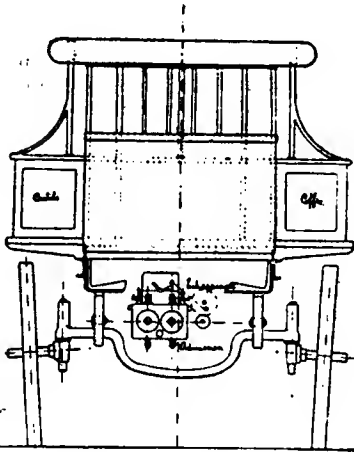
DE DIETRICH MOTOR-LORRY (Front View).
